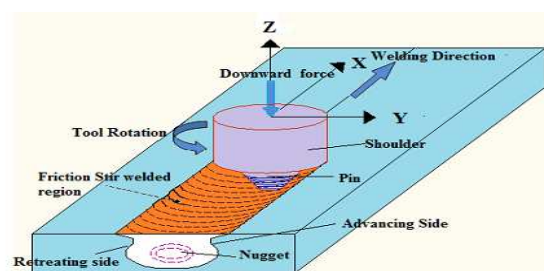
Schematic Diagram of Friction Stir Welding
